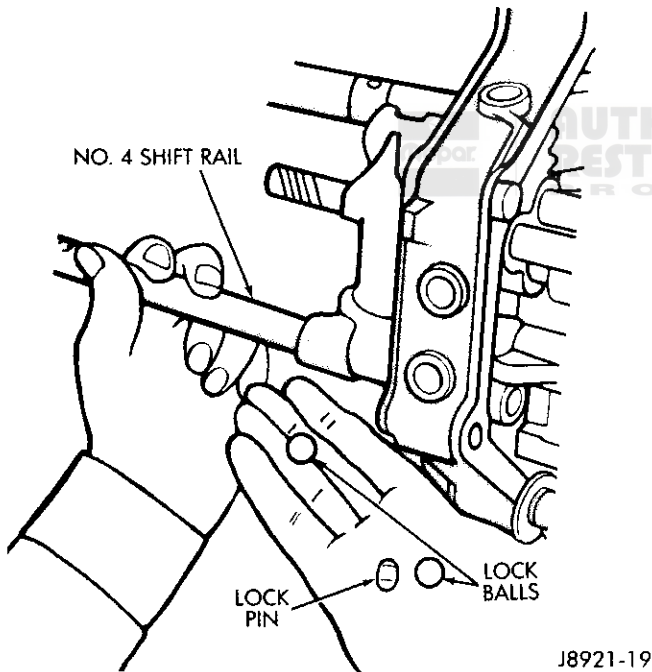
Removing No. 4 Shift Rail, Lock Balls And Pin
